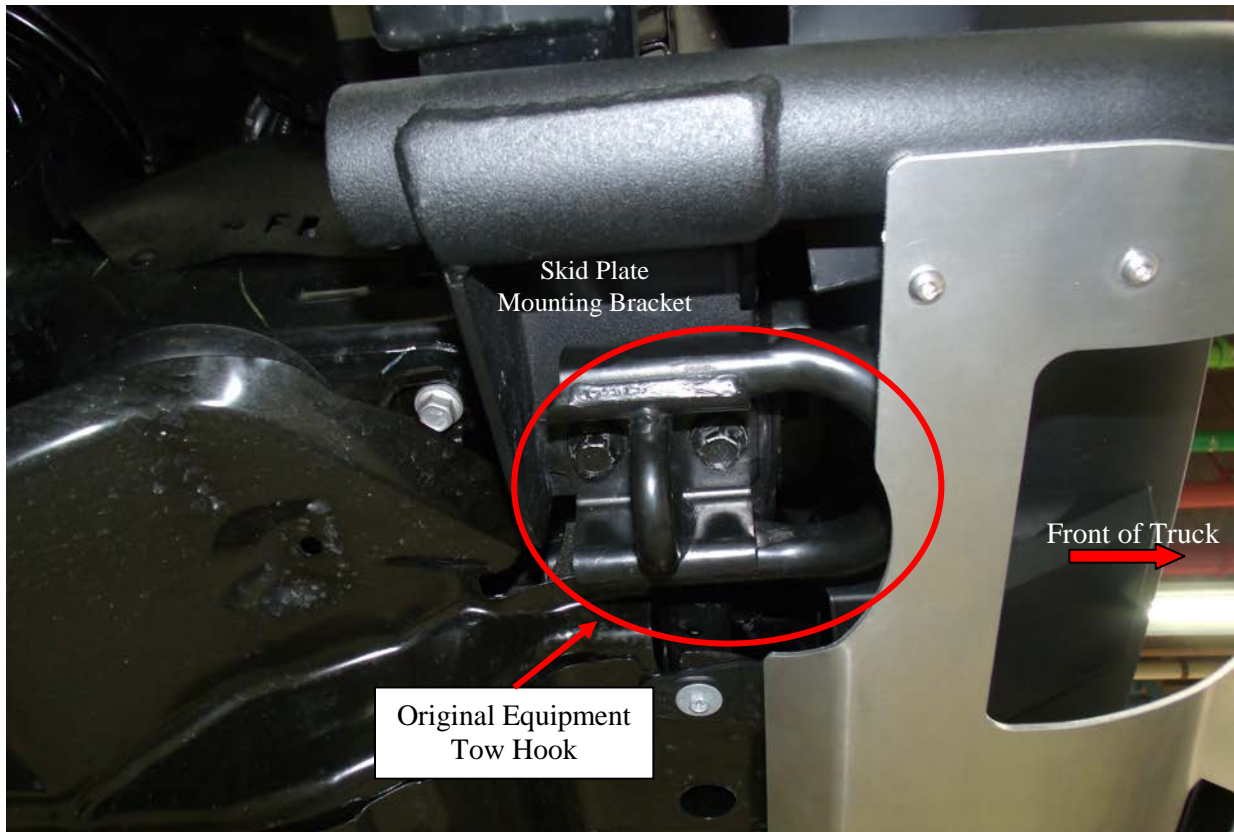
View of Passenger Side with Skid Plate and Tow Hook Installed
